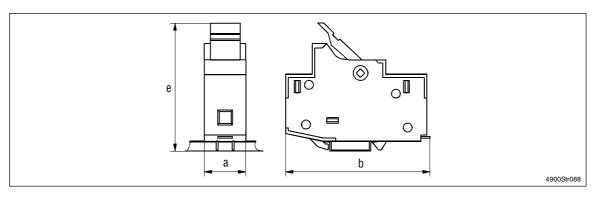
Fuse holder for DIN rail assembly (35mm)
